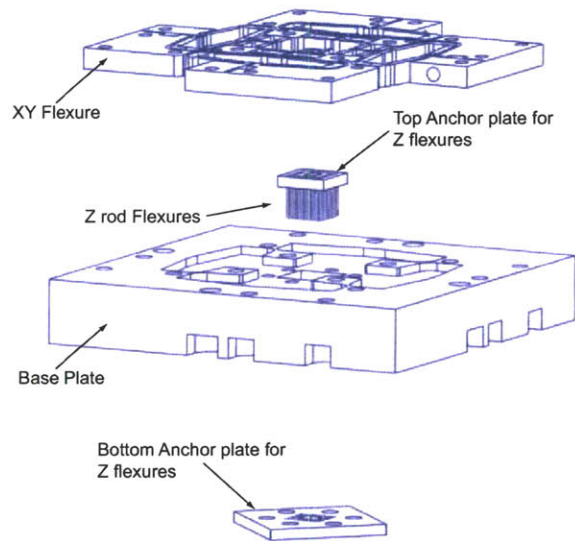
Exploded view showing the components of the nanopositioner assembly. The flexure piece is bolted to the base plate. Sixty four Z rod flexures are bonded with high-strength epoxy to a top anchor plate. A bottom plate that is fastened to the base plate anchors the other ends of the Z rod flexures. The forest of Z rod flexures allows for achieving high Z resonance frequency while still meeting the static range requirement. This picture does not show the Z rod flexures bonded between the ends of the chevron amplifiers and the base plate.
